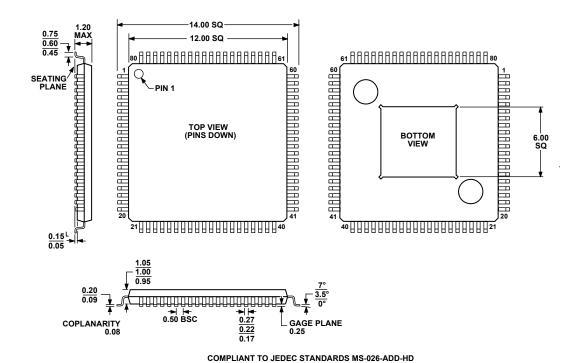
80-Lead Thin Plastic Quad Flat Package, Exposed Pad [TQFP/ED] (SV-80) Dimensions shown in millimeters
